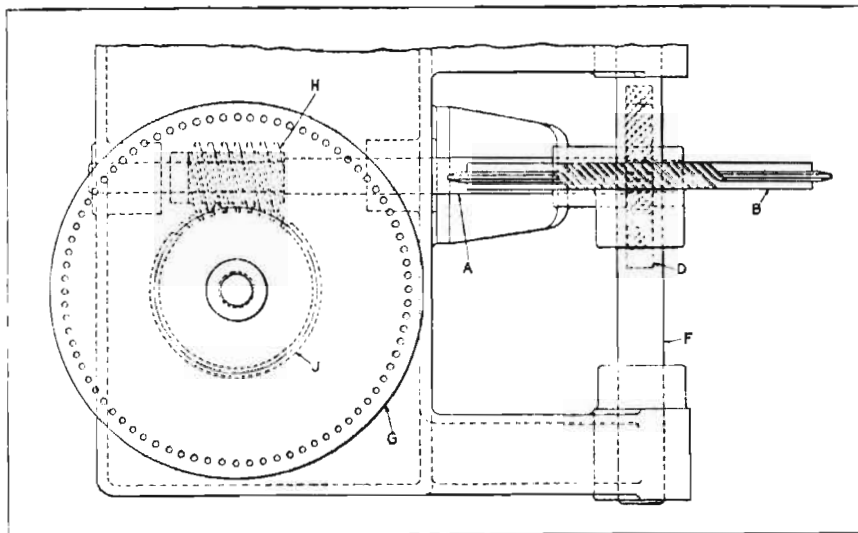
The Number of Indexings of Plate G per Revolution is Increased by Interposing Worm Gearing Between It and Modified Helical Gears B and D.
